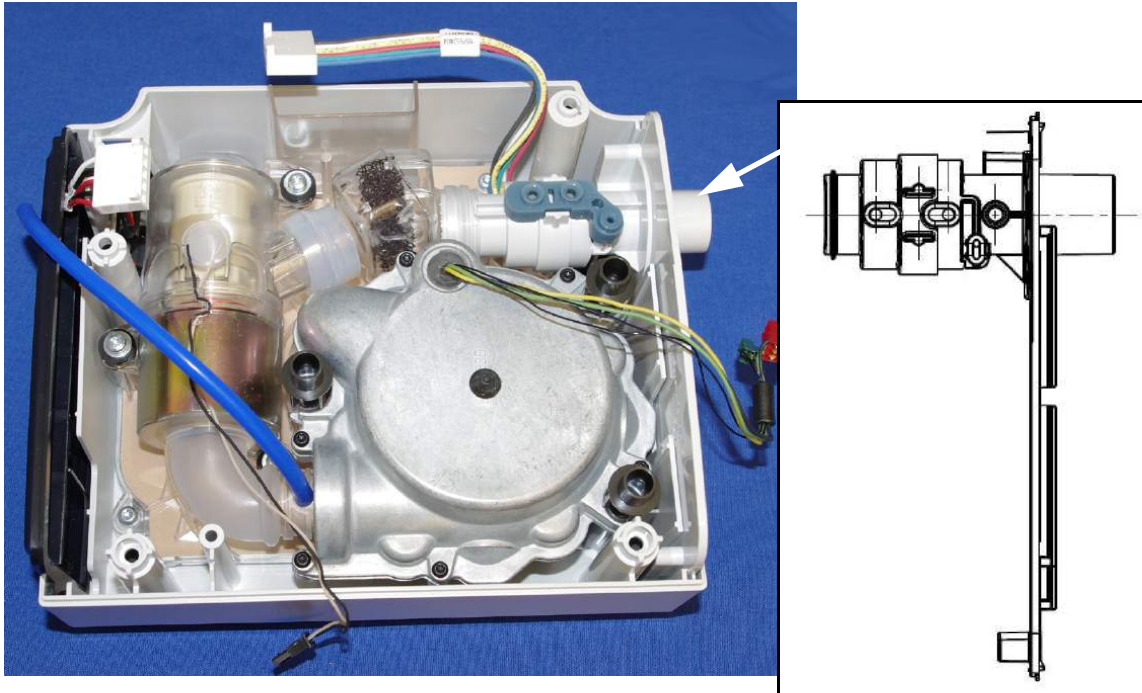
FLOW MANIFOLD (INSTALLED)
